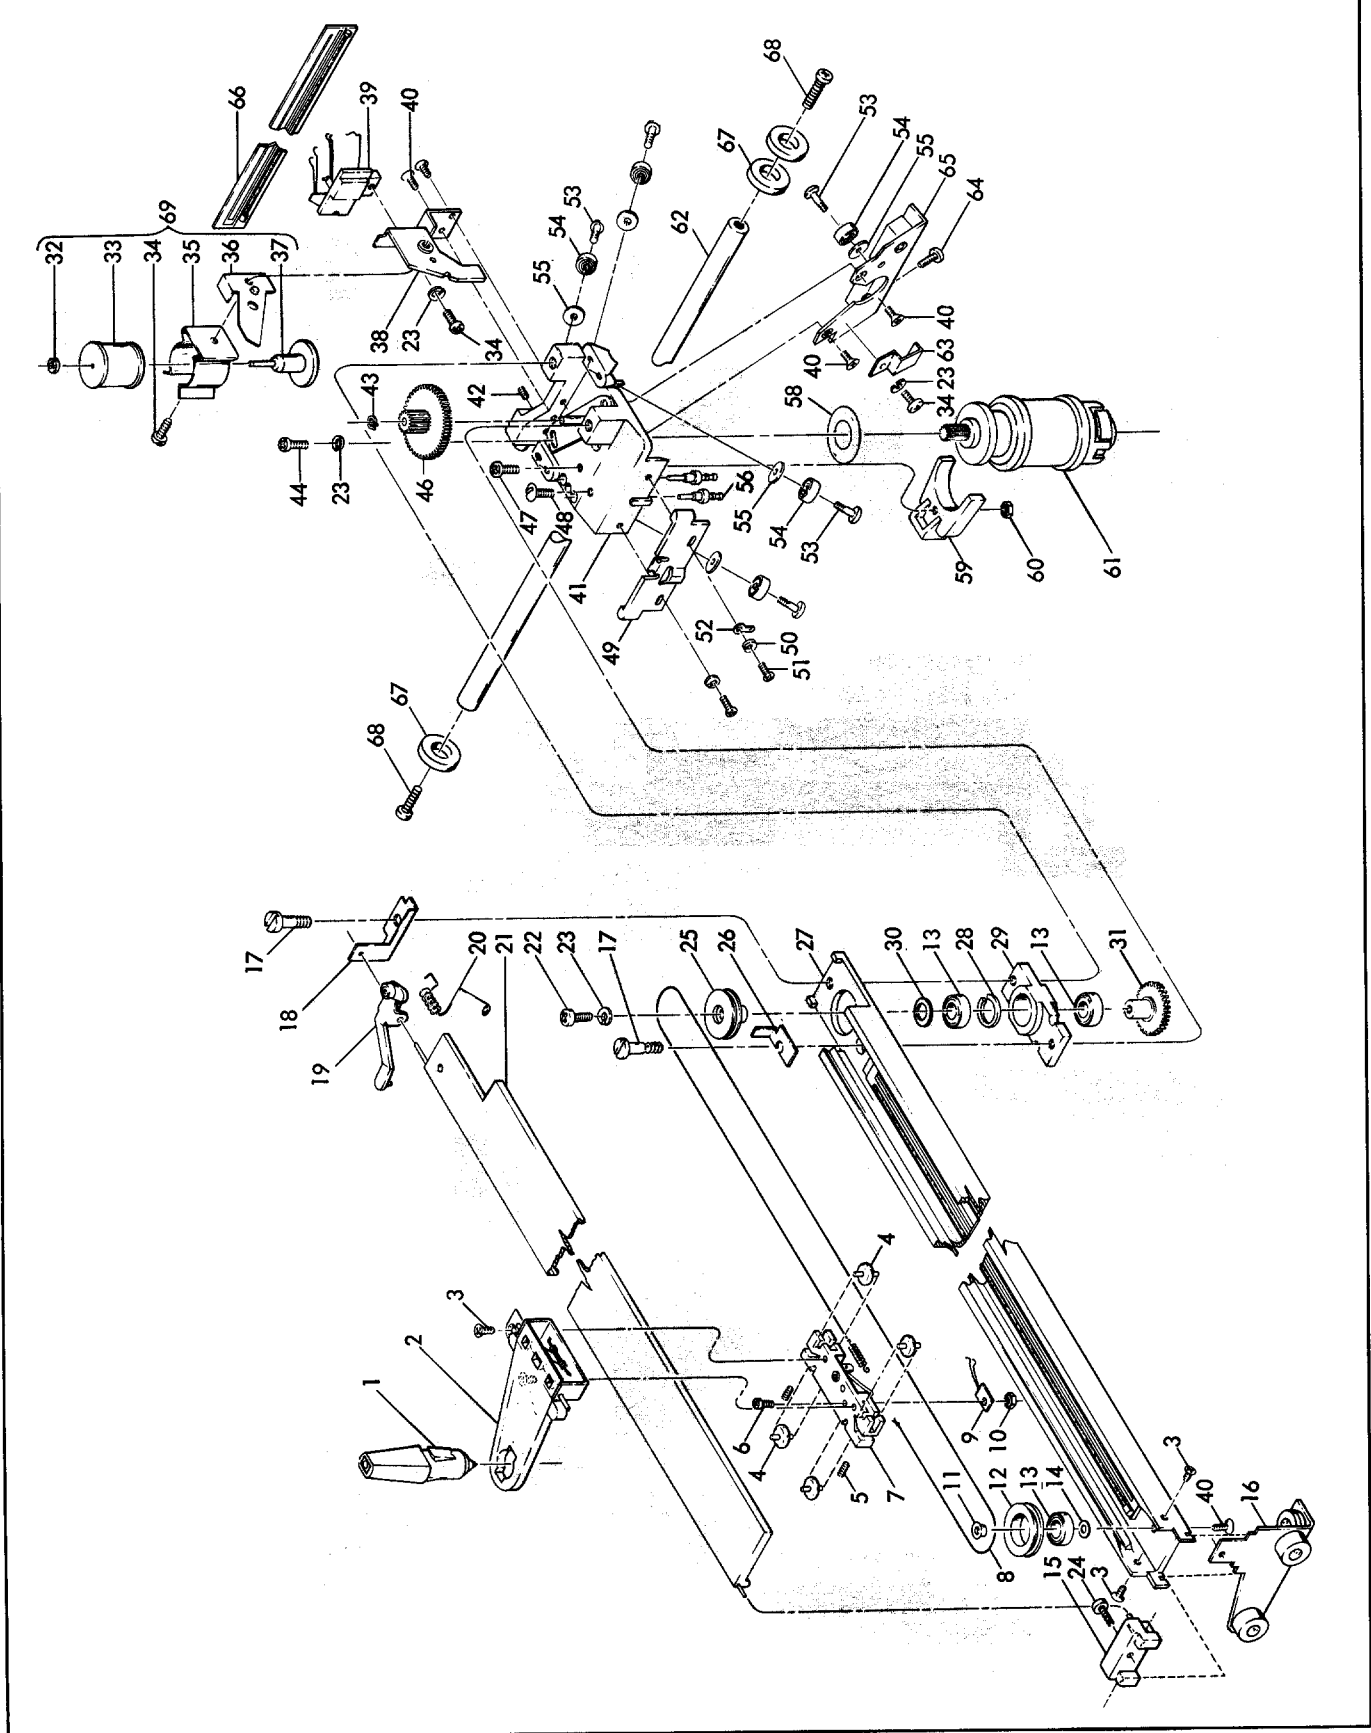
PEN ARM ASSEMBLY (Sheet 1 of 2)
